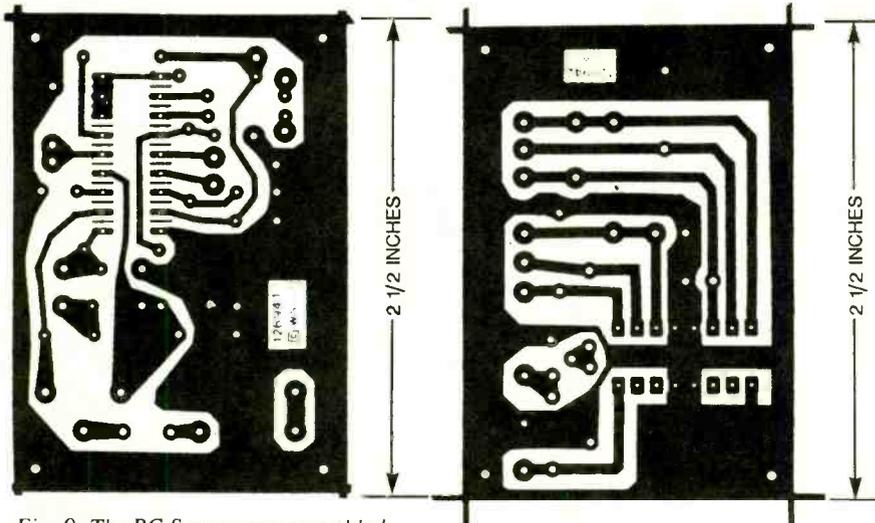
The RC System was assembled on three printed-circuit boards; a full-scale template of the transmitter (which was mounted in a small aluminum box) is shown here.
